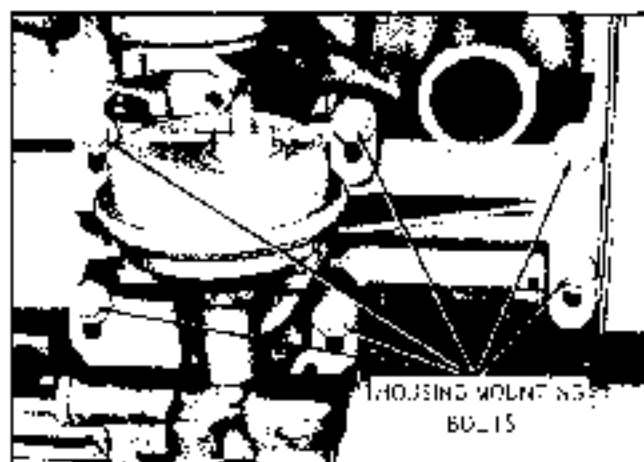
Accessory Drive Housing Mounting Bolts
